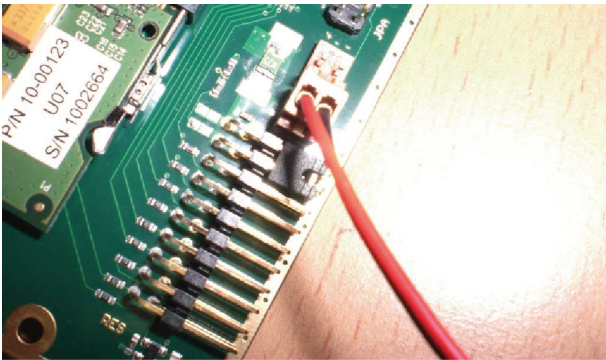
Installation of a USB 2.0 Stand-alone module in mounting chassis - Power supply voltage via power cable
